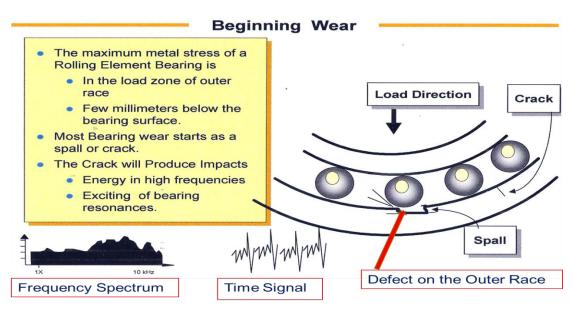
Damages (crack or wearing) on ball bearing (Tuncer TOPRAK, 2023)
